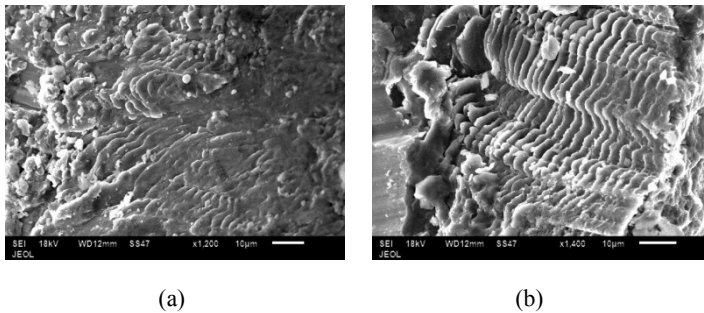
Fatigue fracture morphology showing striations in the conditions: (a) as-welded and (b) as-welded and peened.
